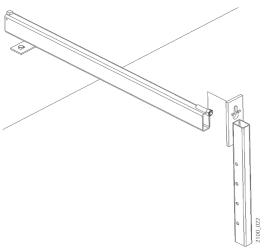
Assembly of Keyhole Attachment on Hanging Platform Beam
